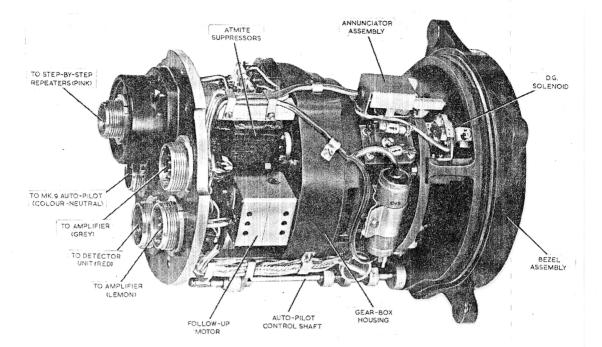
Master indicator, Type A, G.-M. compass, Mk. 4B, view showing back plate and connections
